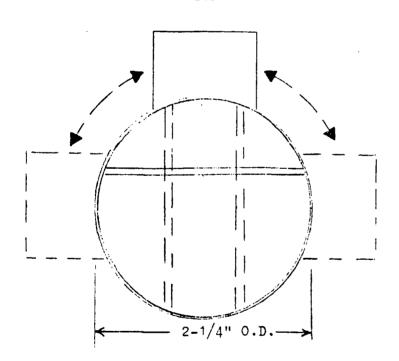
MOISTURE EXTRACTION SYSTEM ASSEMBLY.
